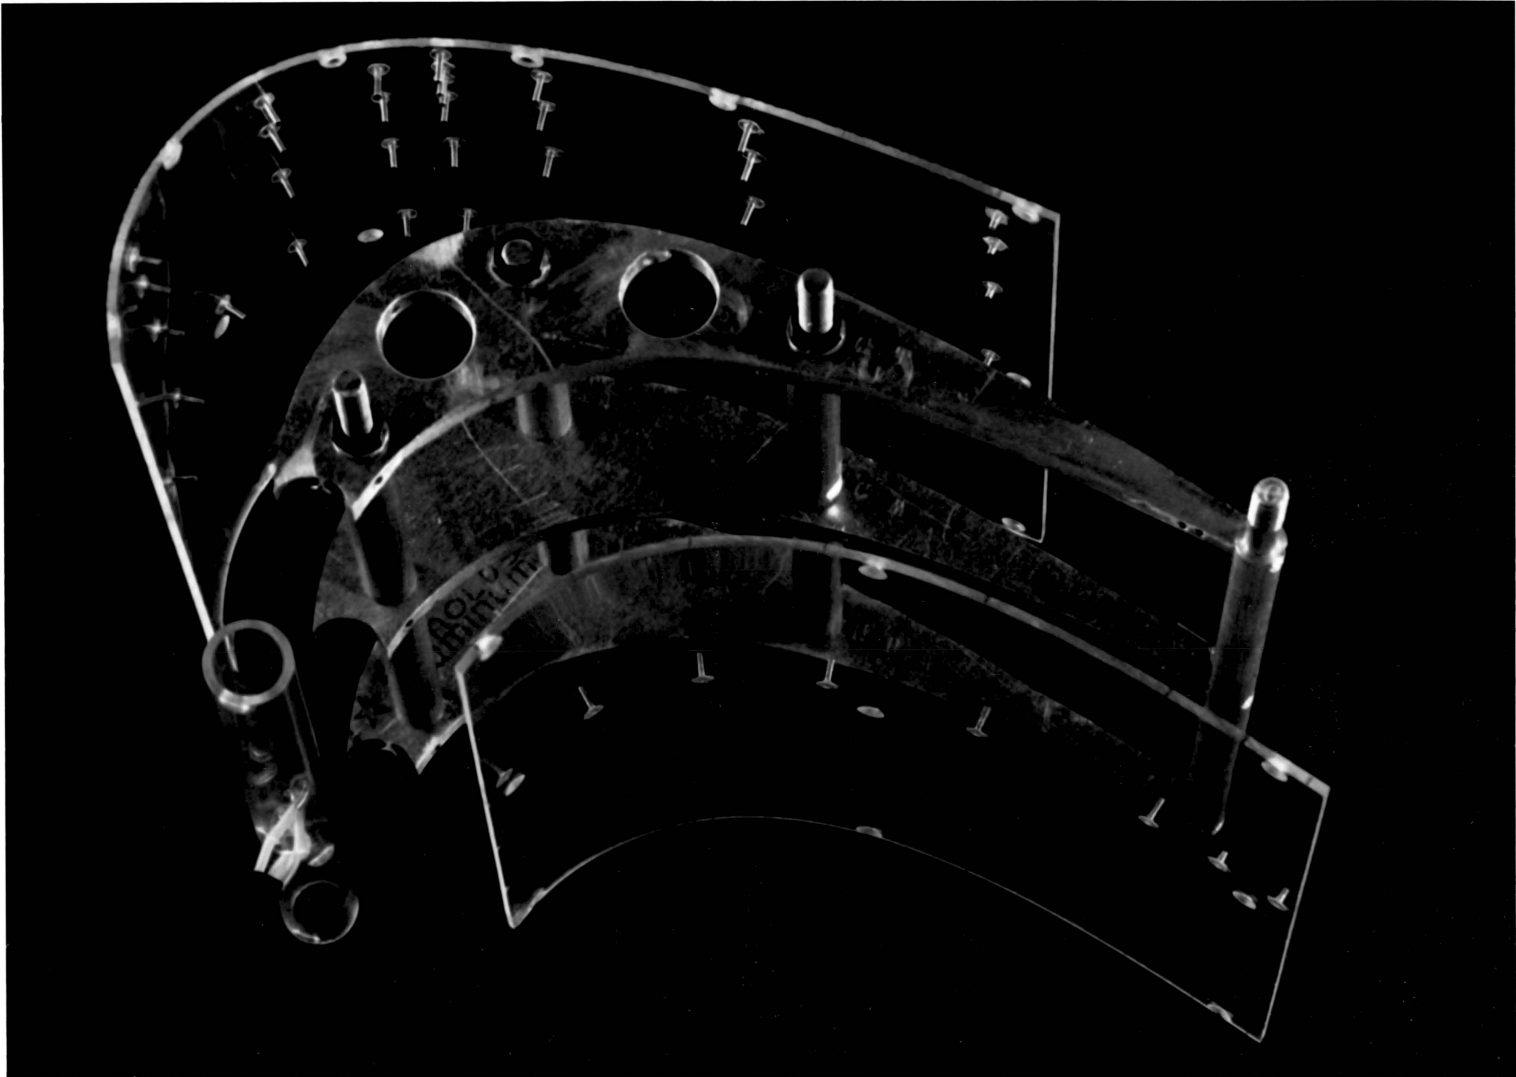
Example of Blade Construction Technique [15], Showing Individual Components.
